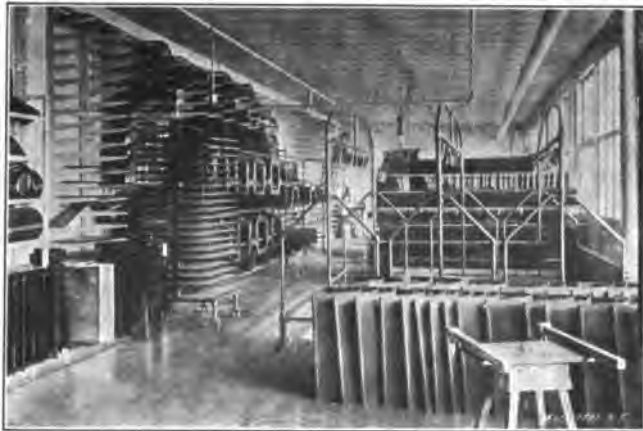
Storage of Enamelled Parts, showing Wheeled Stands used in the Baking Ovens
